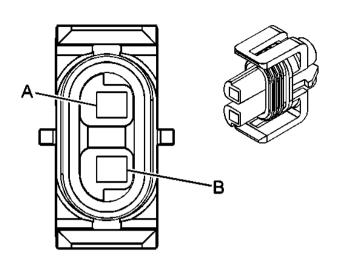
HVAC Control Module Component Views Courtesy of GENERAL MOTORS CORP.
